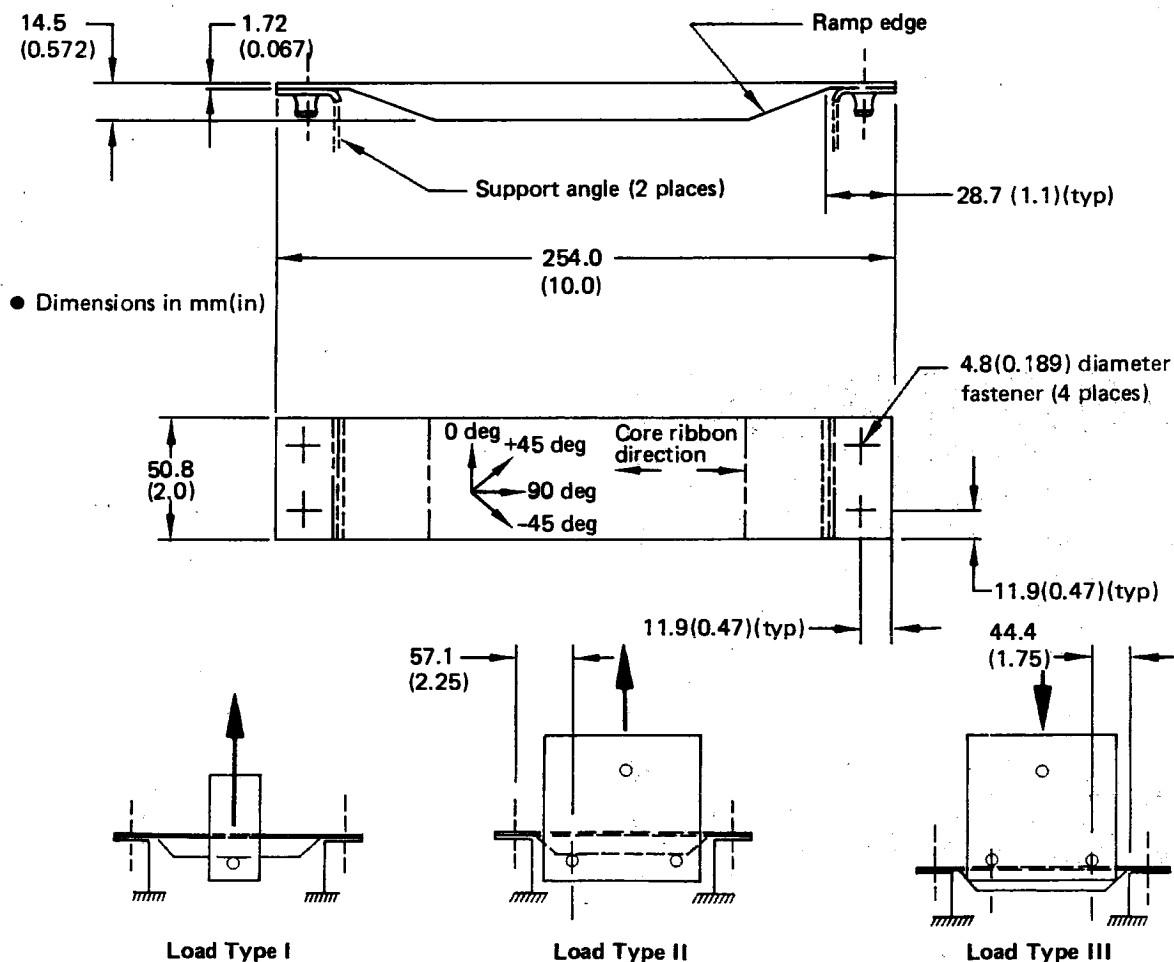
Panel Edge Shear and Bending Test Specimen Geometry (Test 12)
